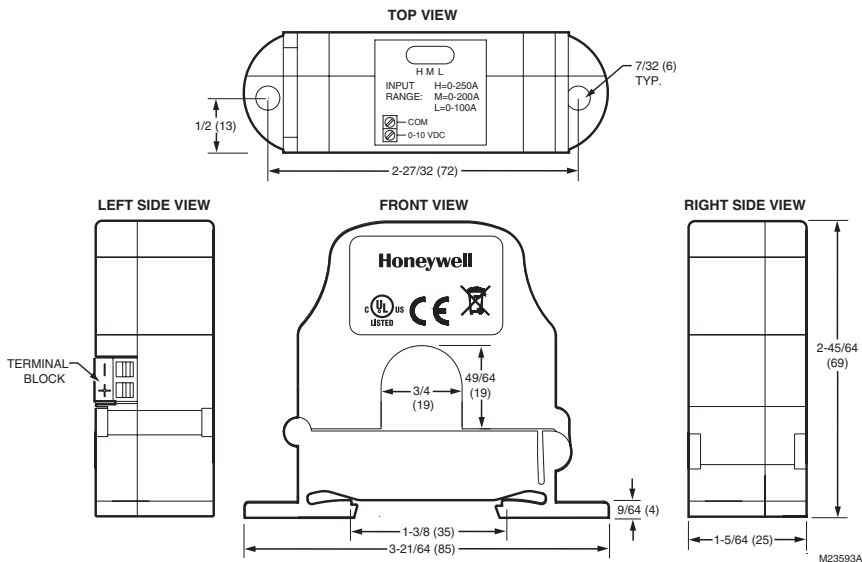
CTP Current Sensor Dimensions in Inches (mm).
